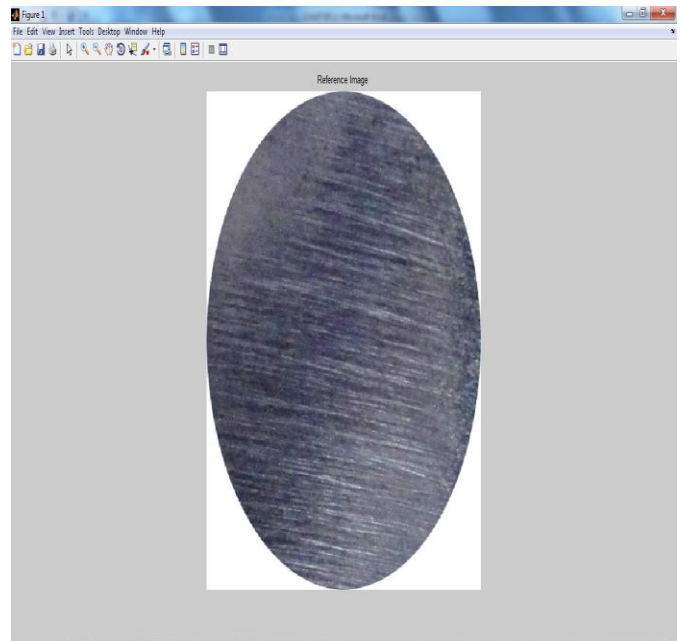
Cross sectional view of Steel Rod Surface Reference image
